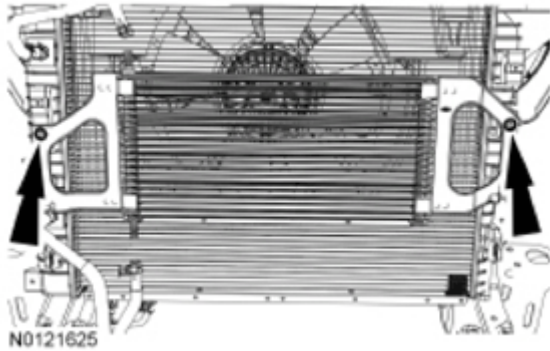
Locating OTA Transmission Fluid Cooler Mounting Bolts
